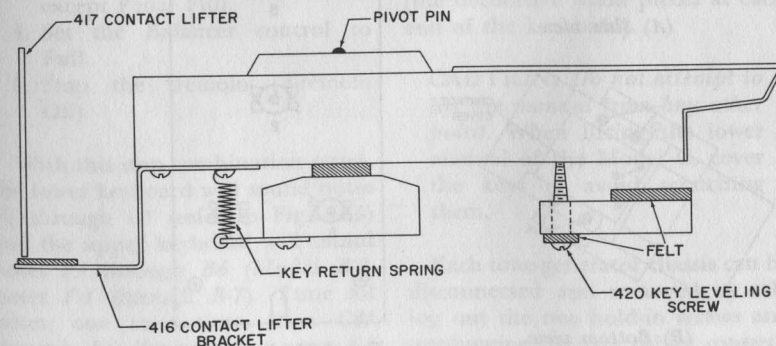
Contact-lifter and key-leveling adjustments.
